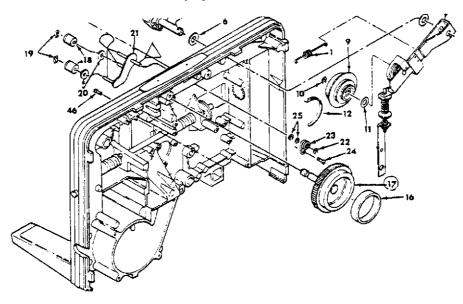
REMOVAL AND REASSEMBLY OF TAKE-UP GEAR
